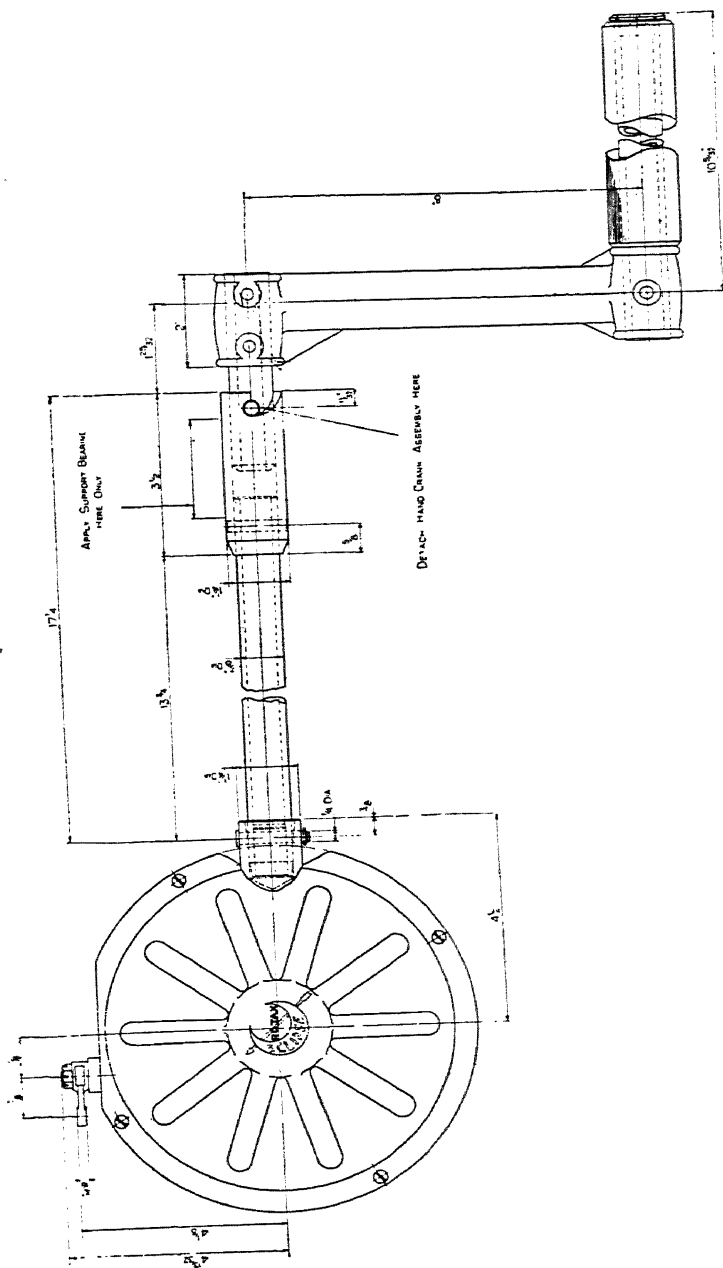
HAND CRANK AND EXTENSION ASSEMBLY
